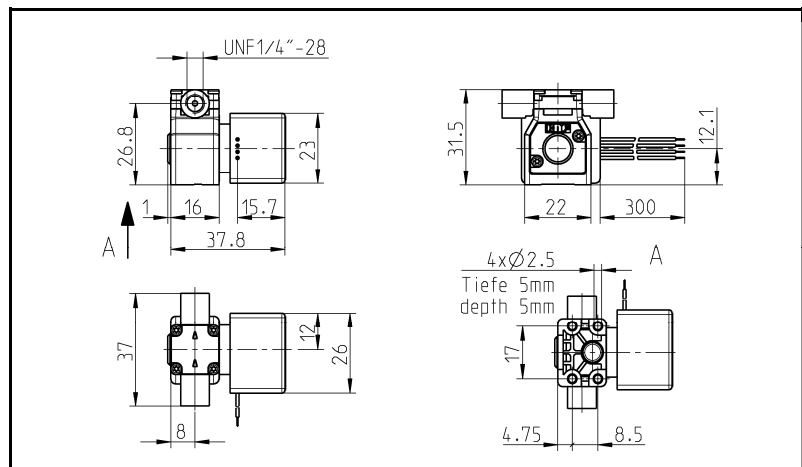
Mounting dimensions NF 1.5 DCB-4
